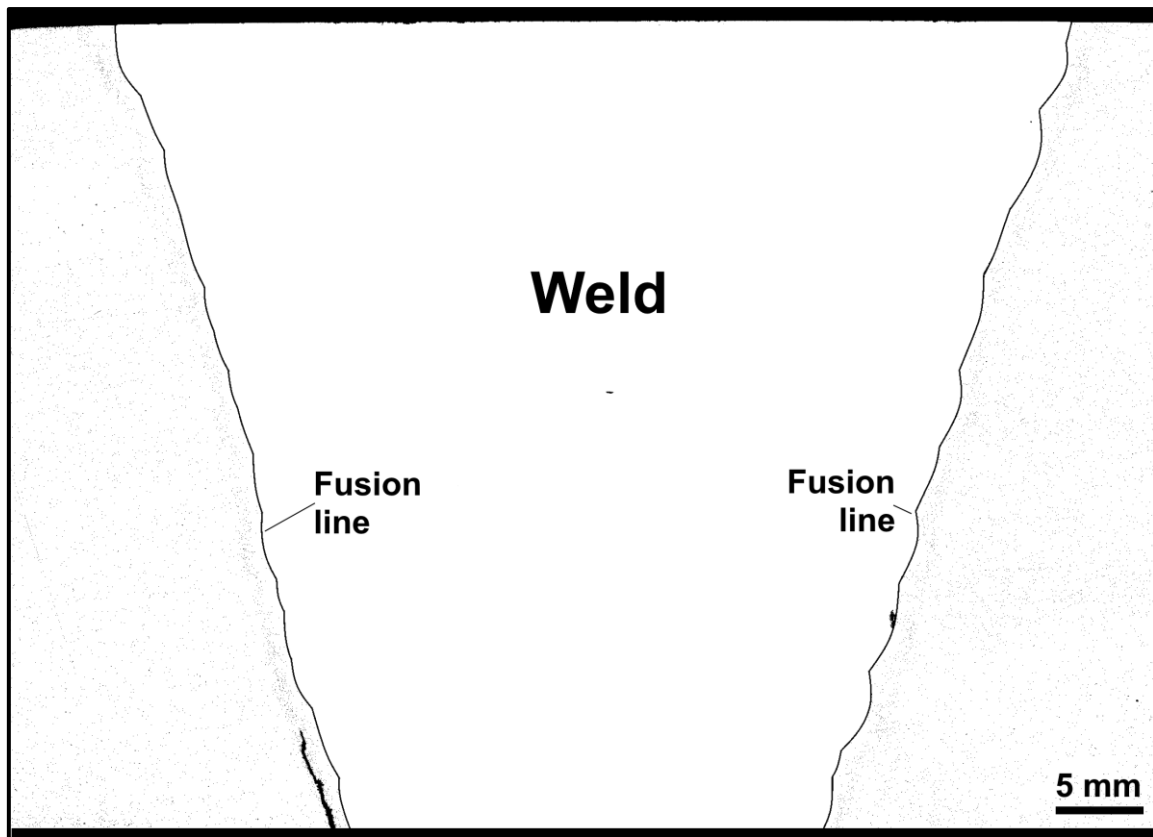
Macro-image of damage in feature-type cross-weld test sample F-TP1-4
